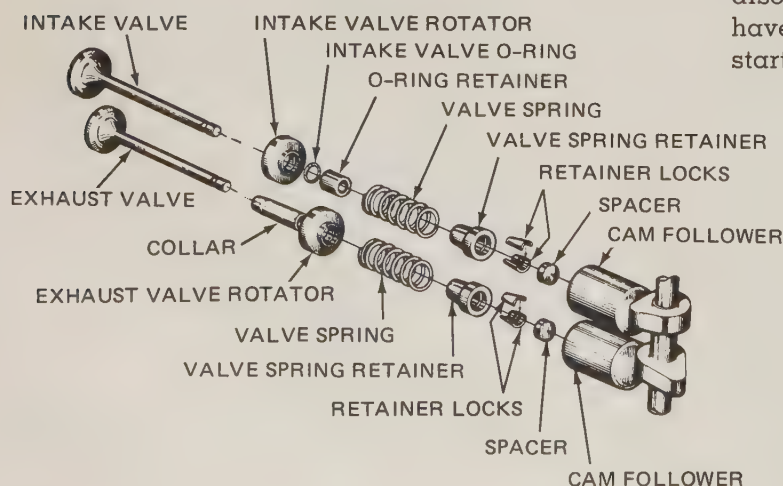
Exploded view of the valve train of a direct-acting single-overhead-camshaft outboard engine. (Homelite)
